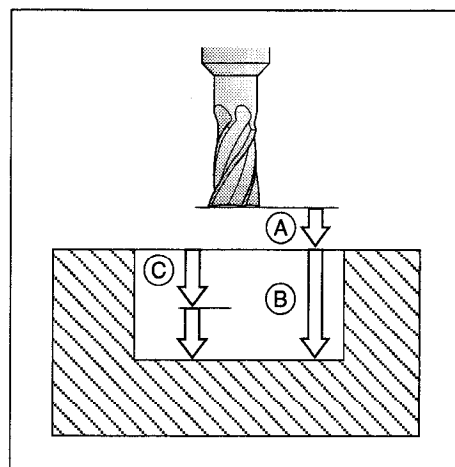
Infeeds and distances for the POCKET MILLING cycle
